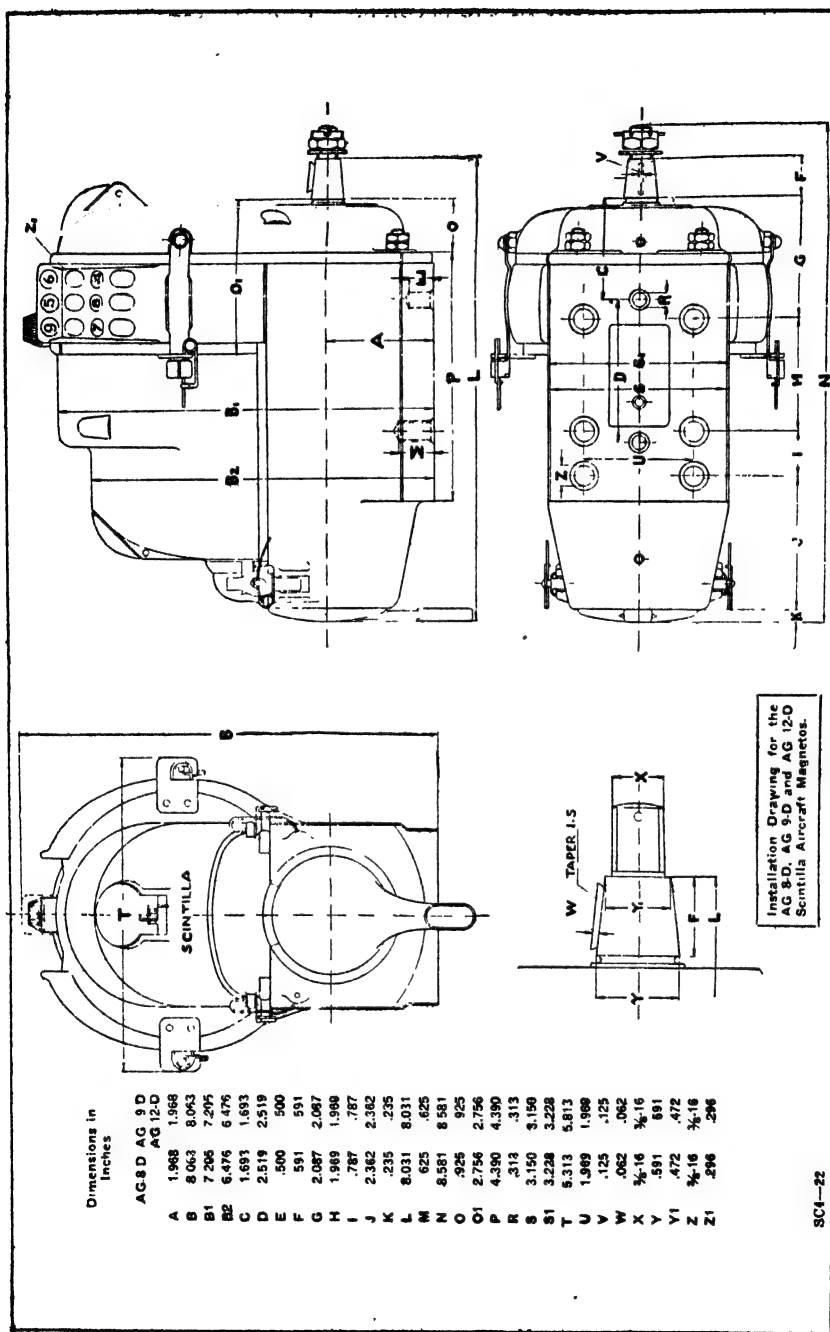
Installation Drawing for the AG-8D, AG-9D and AG-12D Scintilla Aircraft Magnets.
